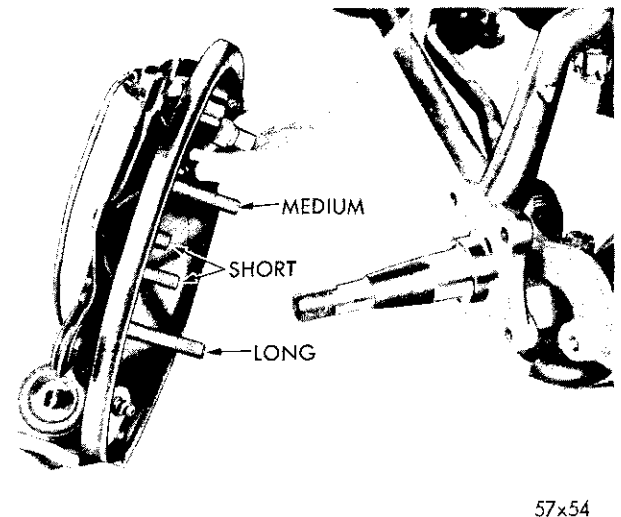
Removing Brake Support Plate and Brake Assembly (Front)
